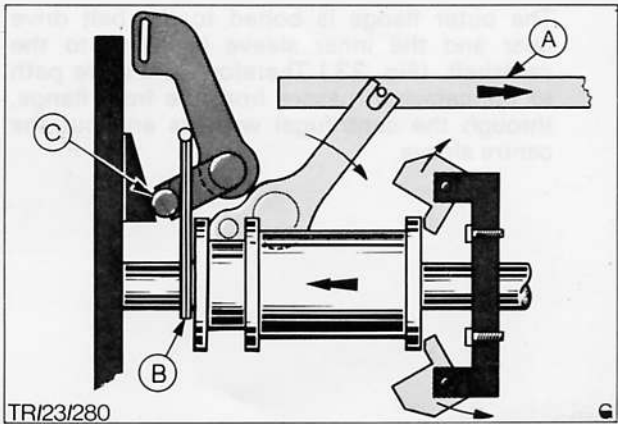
Throttle and governor assembly during full throttle and high engine revs
